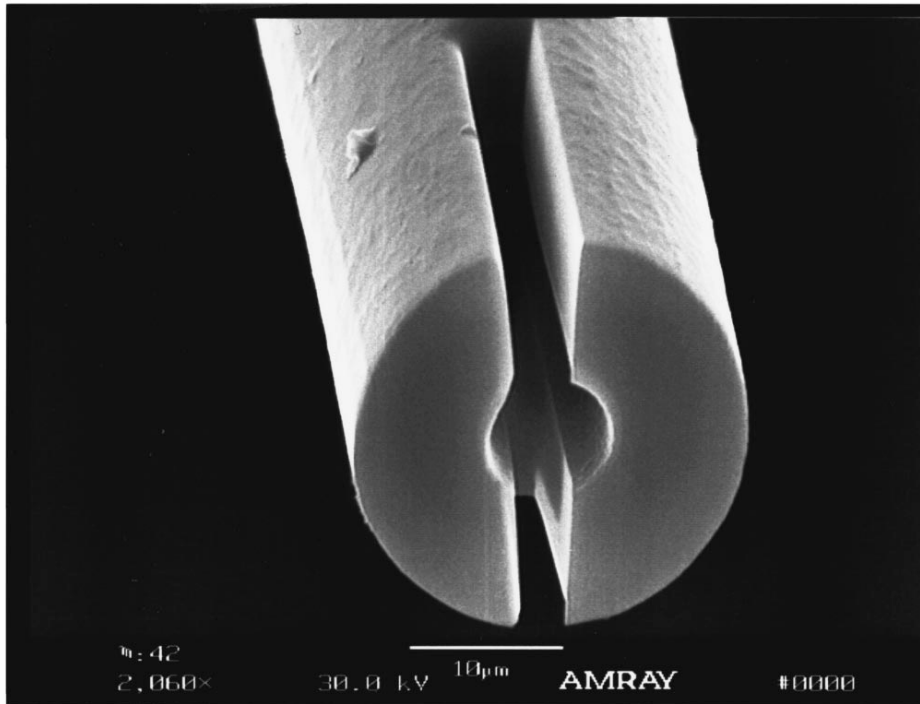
Nominal 30 μm diameter fused silica microtube by FIB milling [14].
